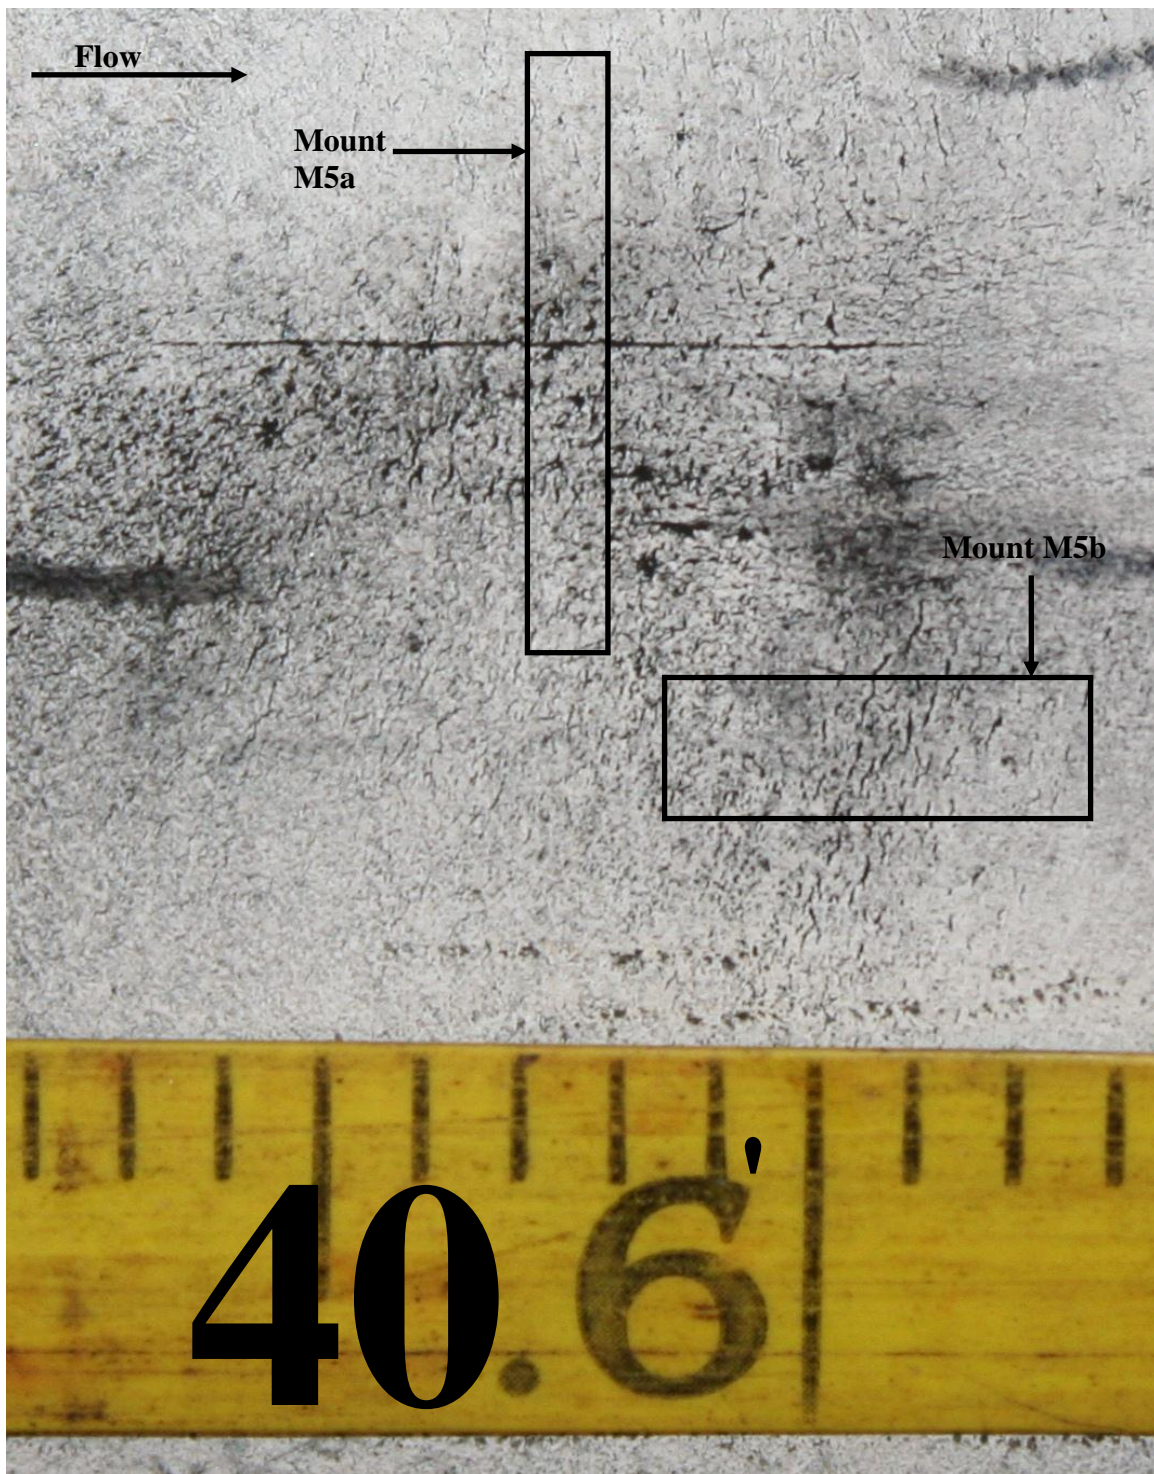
Photograph of the external pipe surface showing Crack Colony 5 following MPI. The tape measure indicates the distance from the U/S girth weld.
